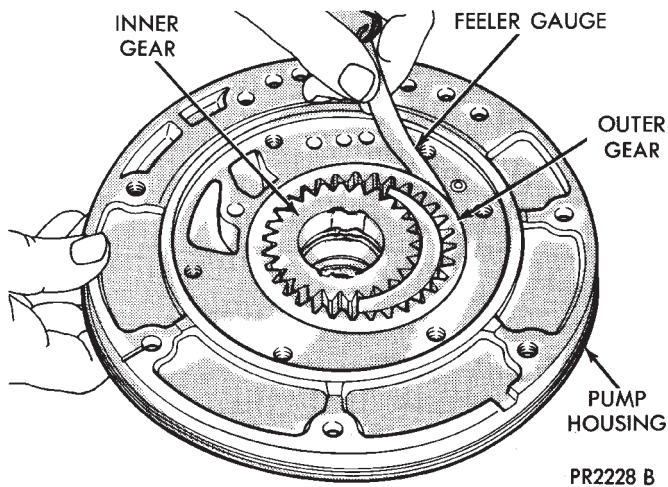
Measuring Pump Clearance (Gear to Pocket)
